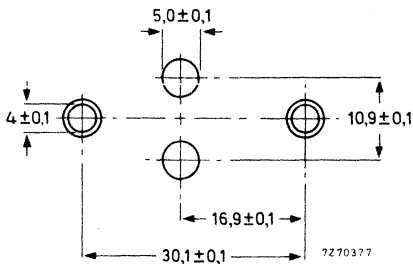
Hole pattern for 500 V insulation, nut fastening.
